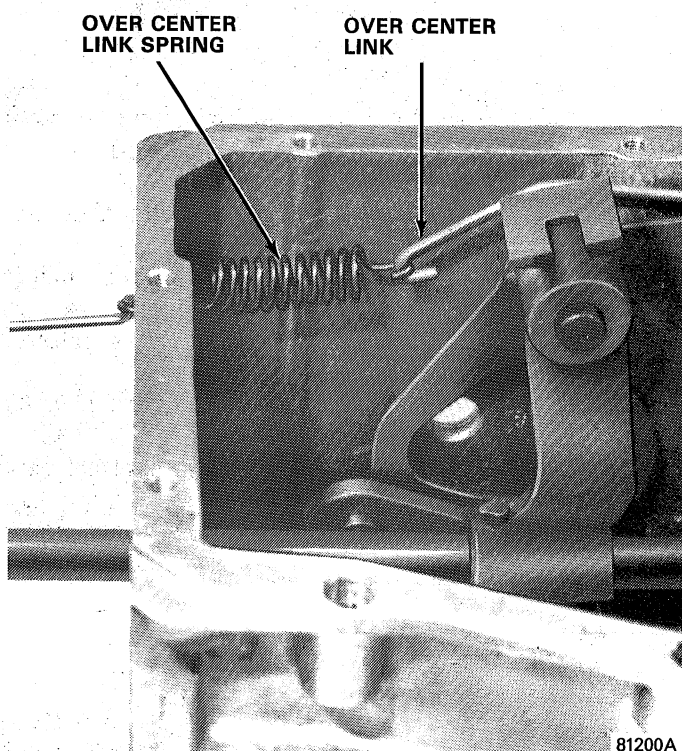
B-47 Reverse Lever Overcenter Link Spring Removal/Installation
